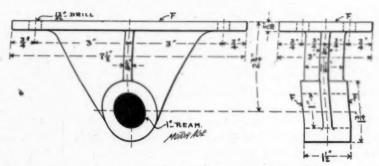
CONTROLLING LEVER BRACKET. 2—Cast Iron.
